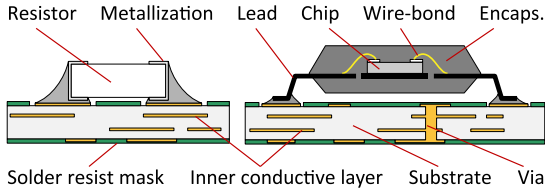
Schematic of soldered surface-mounted components. *Reproduced with permission from G. Harsányi, Elektronikai Technológia és Anyagismeret, University lecture notes, BME-ETT, 2019, ISBN: 978-963-421-791-6 [2].
